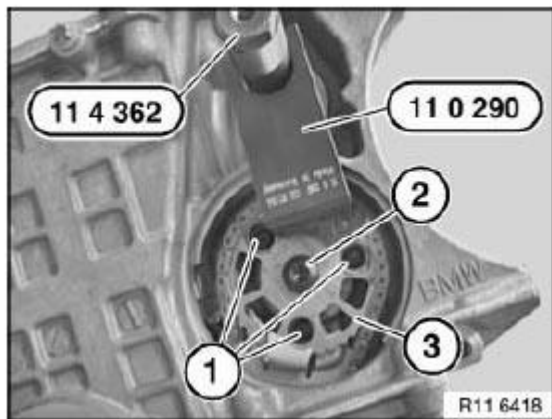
Identifying Special Tool (11 0 290) And (11 4 362)
